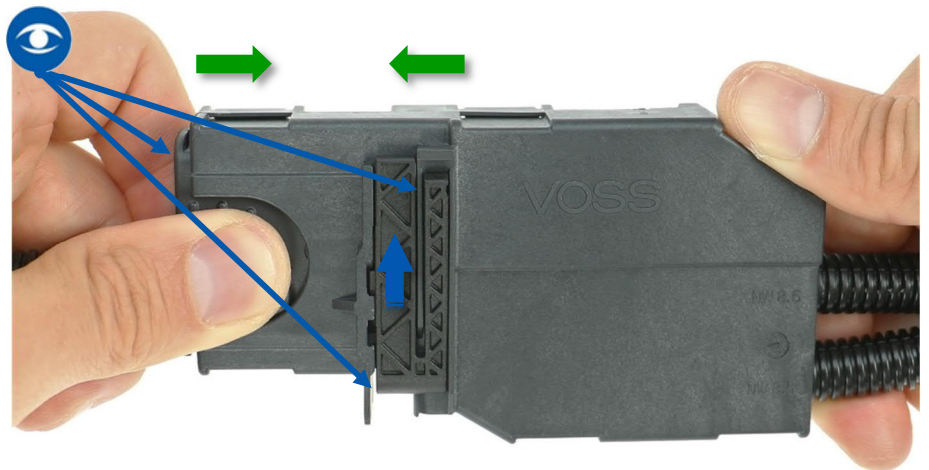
Incomplete assembly step of manifold 301 ^{EFSM}
